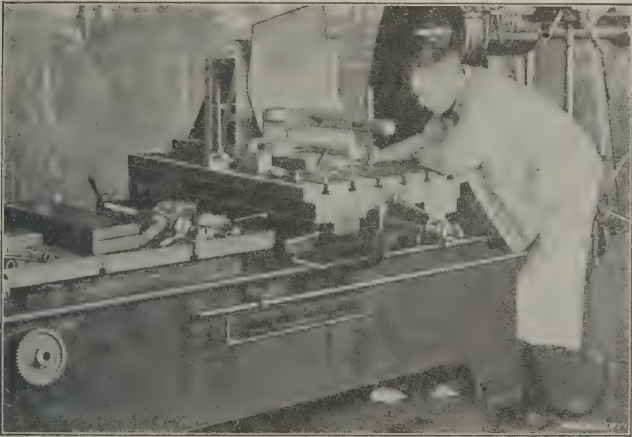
Setting-up and Locating Experimental Work on Boring Machine
